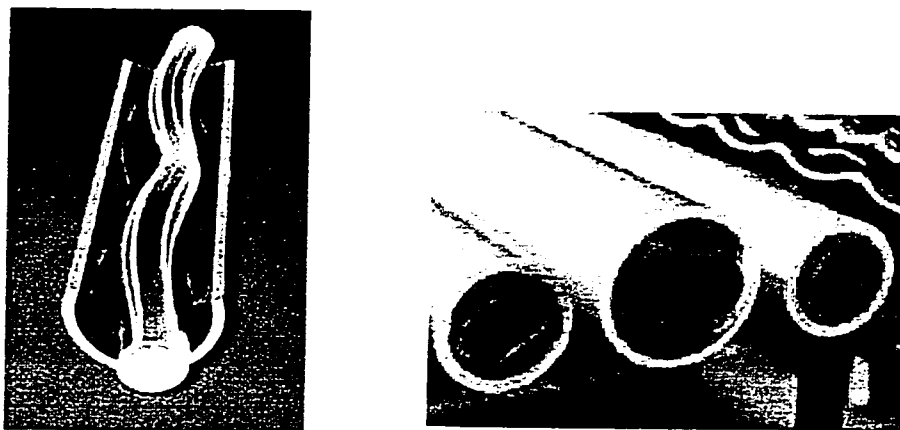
Photographs of single-lobe pump rotor with sectioned stator (left) and single-lobe stators (right).
